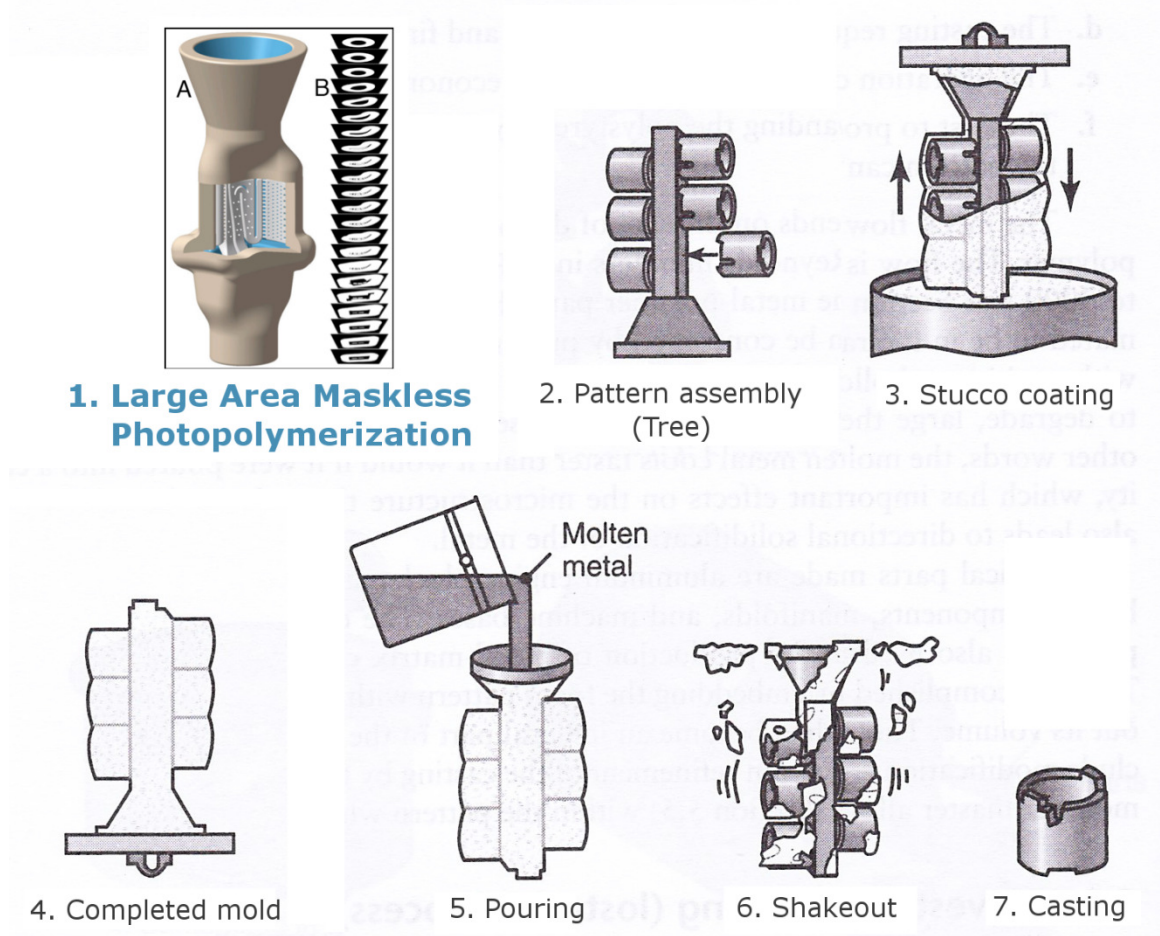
Schematic of the investment casting process [2] with the incorporation of LAMP [3].
